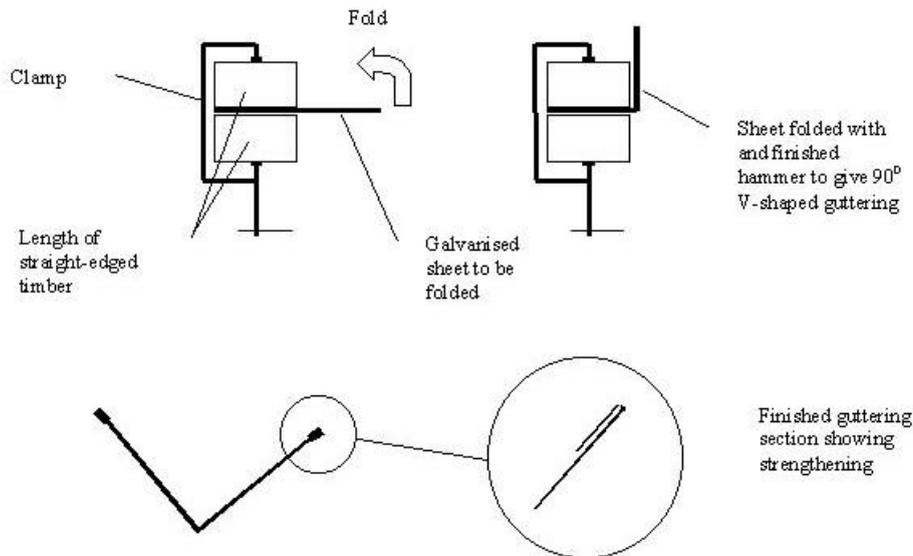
folding galvanised steel sheet to make V-shaped guttering
